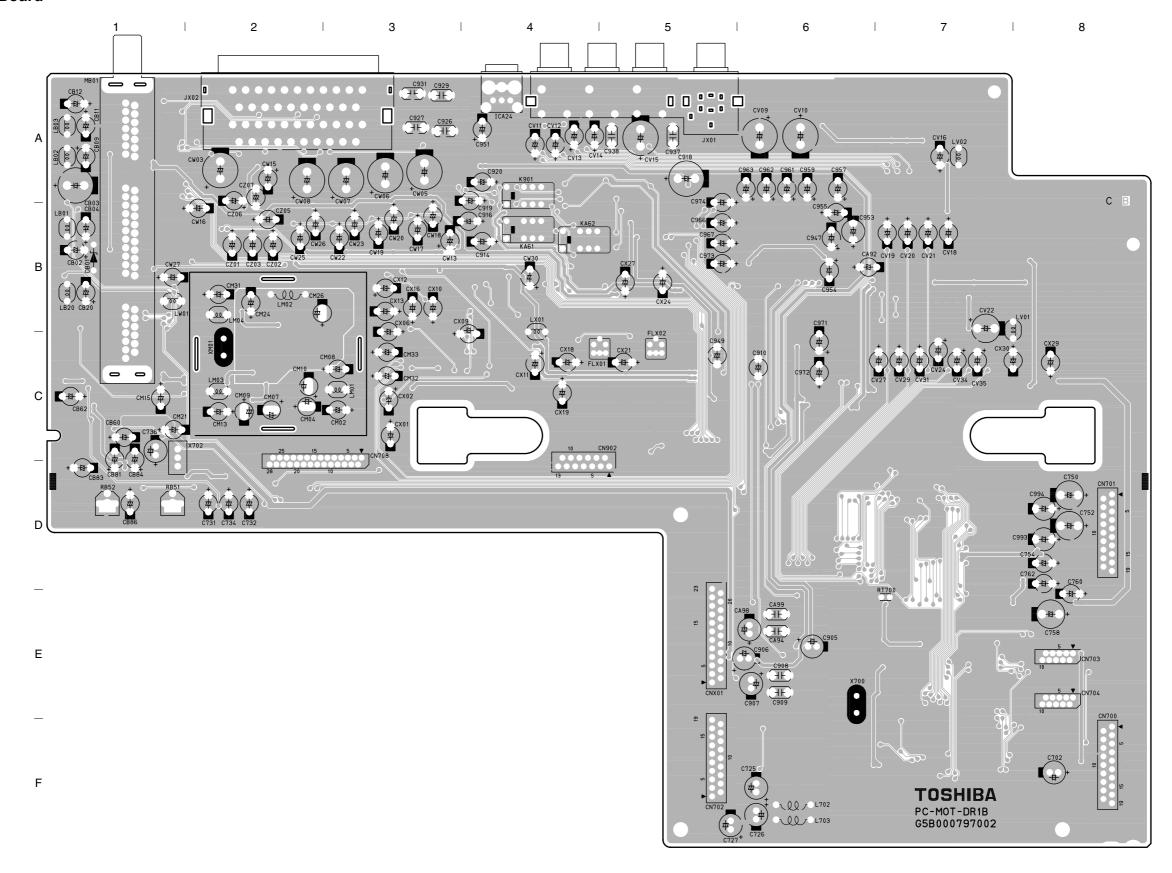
EU05 Mother PC Board (Top side)
